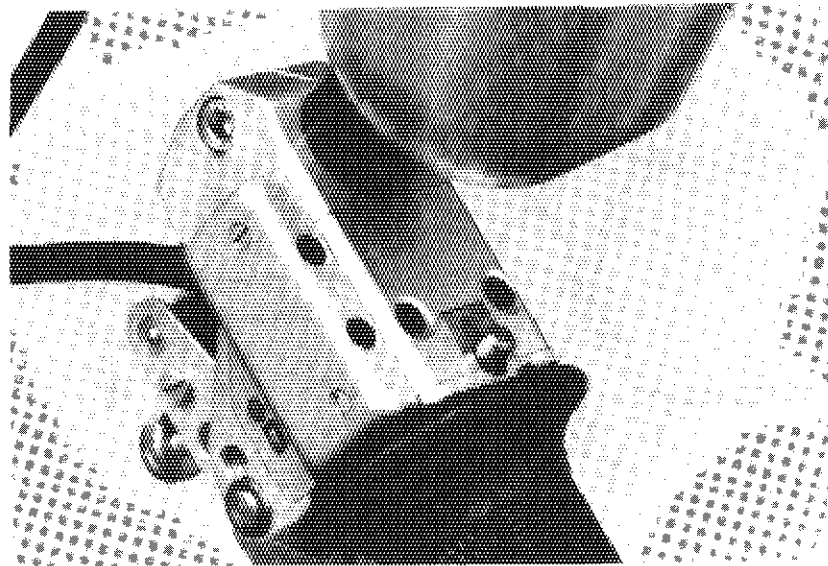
Control switches at part of a grip handle of the type A 100 manipulator
